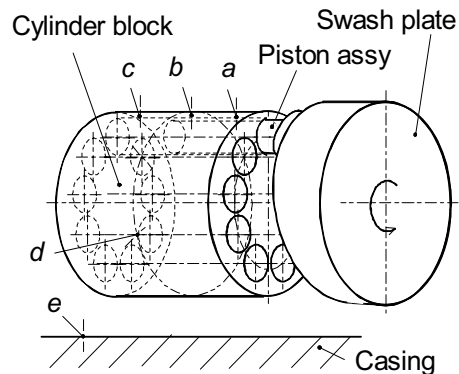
Location of thermo-couples installed in the cylinder block and casing (rotating swash-plate type piston pump)
